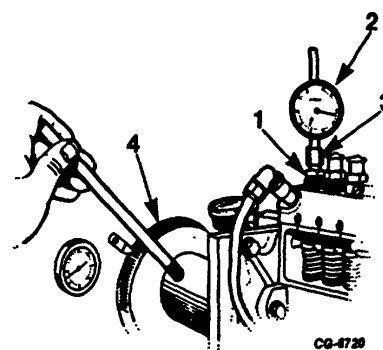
Establishing Initial Plunger Lift (No. 1 Pumping Element)
